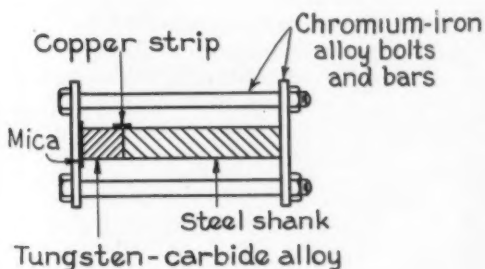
Though a last resort, alloy-steel clamps are occasionally employed to hold parts together. The assembly shown is a knife with tungsten-carbide cutting edge.
